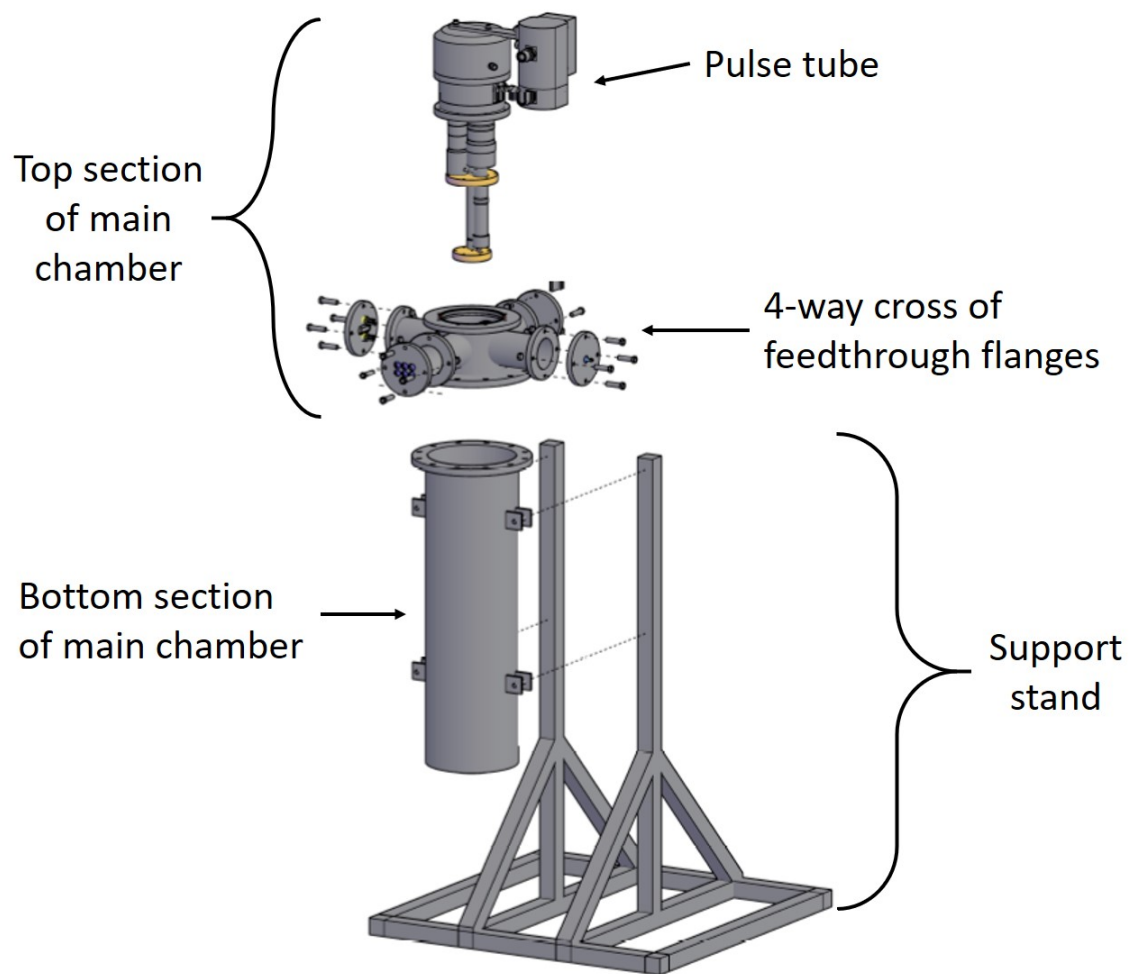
Exploded view of the main vacuum chamber showing the pulse tube, 4-way cross of feedthrough flanges and the bottom section of the chamber with its support stand [1].
